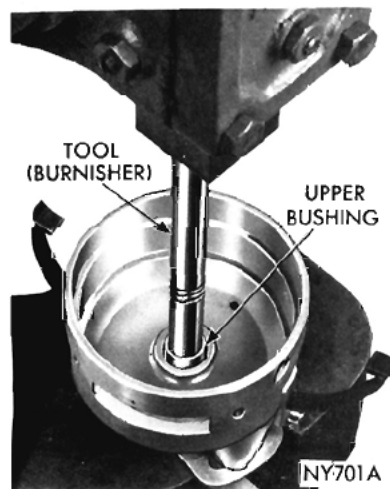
Burnishing Distributor Housing Bushings (Typical)
